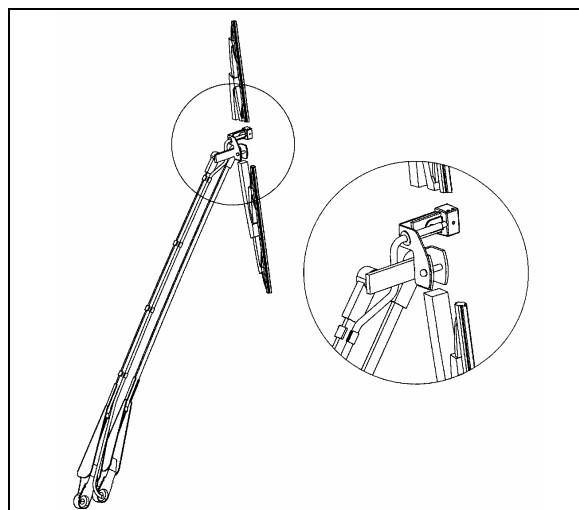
WINDSHIELD WIPER (DRIVER SIDE)
